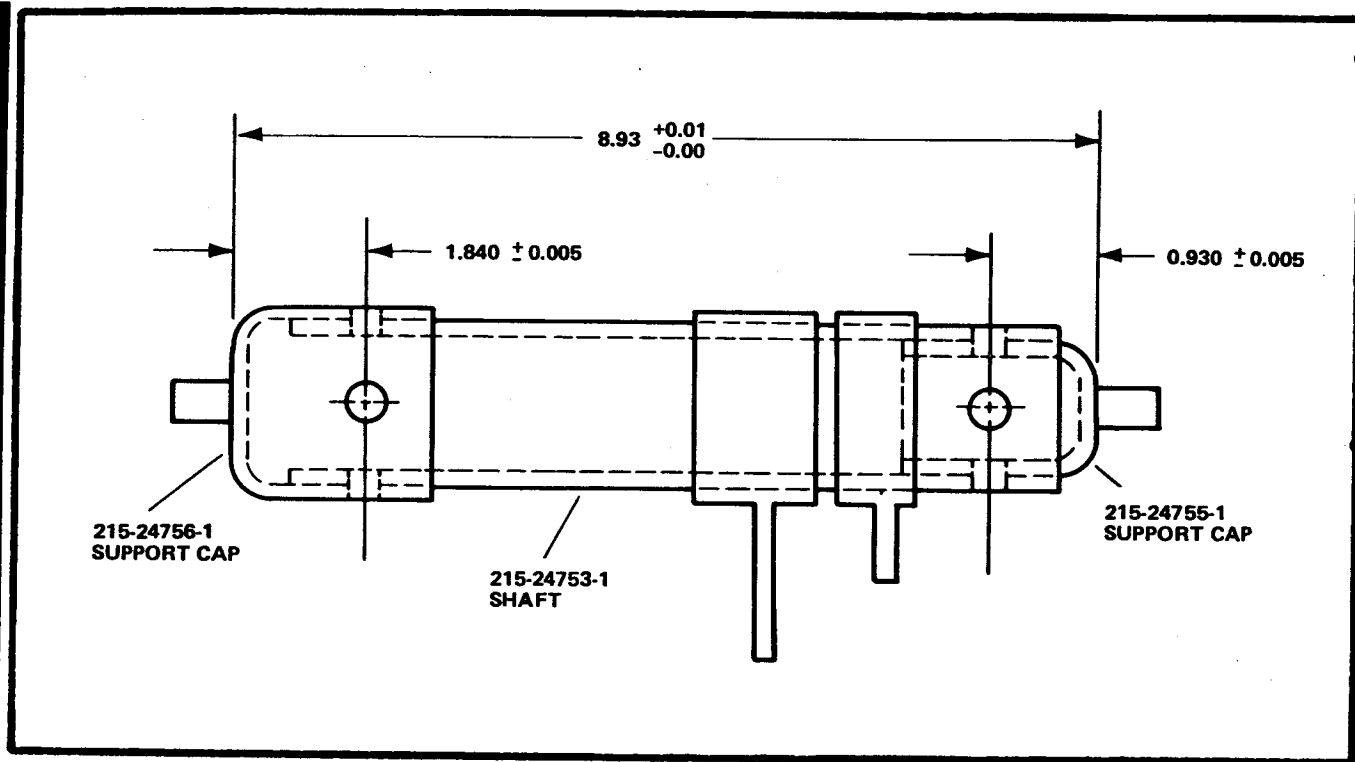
A. Support Cap Assembly, Part No. 215-24082
